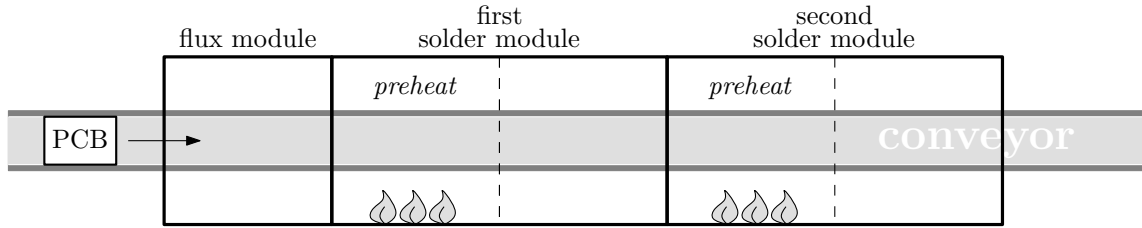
A Selected Wave Soldering (SWS) machine with three units; a flux unit and two soldering units.
